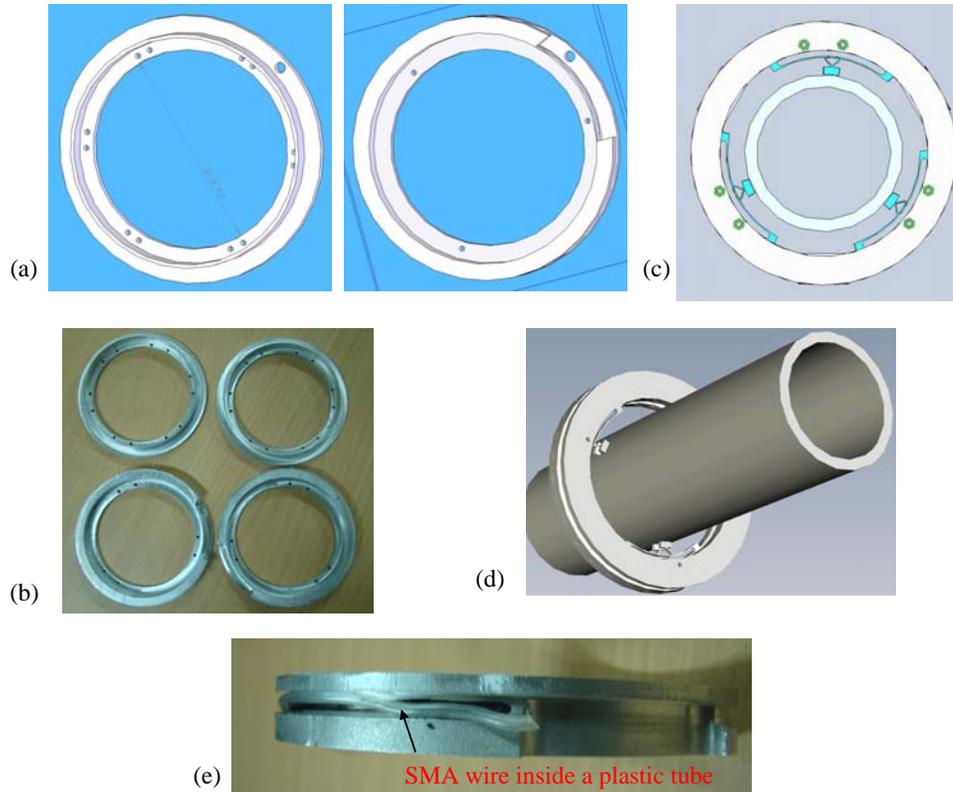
Housing and assembly for the clamping ring. (a) two halves of the housing, (b) two pairs of aluminium housings made using CNC milling, (c) solid model of the assembled clamping ring, and (d) the clamping ring on the pipe.
